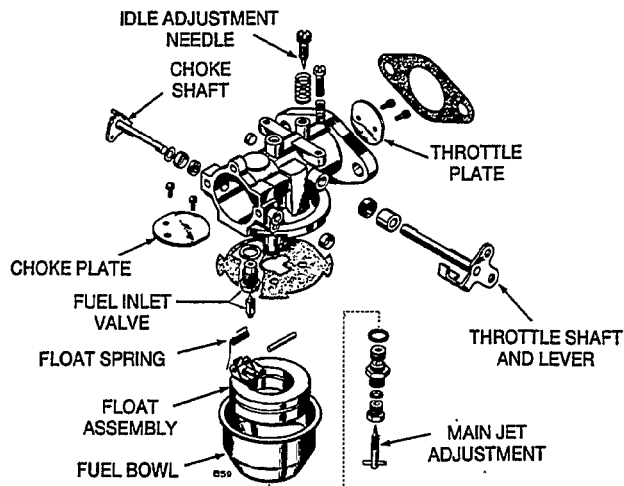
SIDEDRAFT CARBURETOR ASSEMBLY
